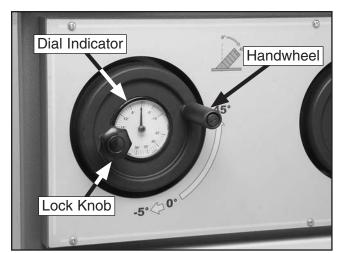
Spindle tilt handwheel, lock knob, and dial indicator.
